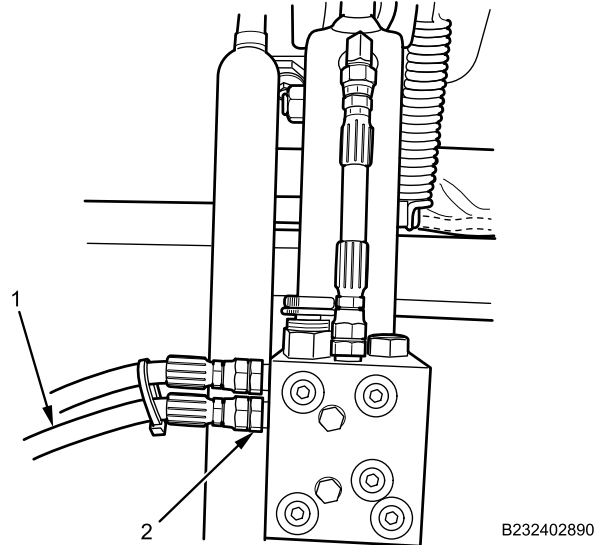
Hydraulic Power Module-to-Hydraulic Cylinder Hose Installation.
